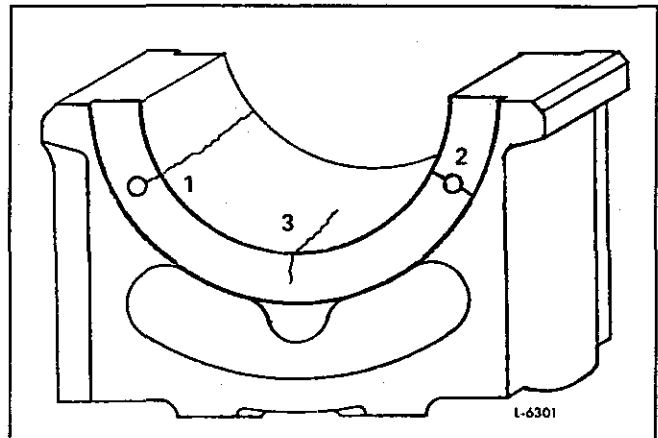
6V Rear Main Bearing Cap Cracks
